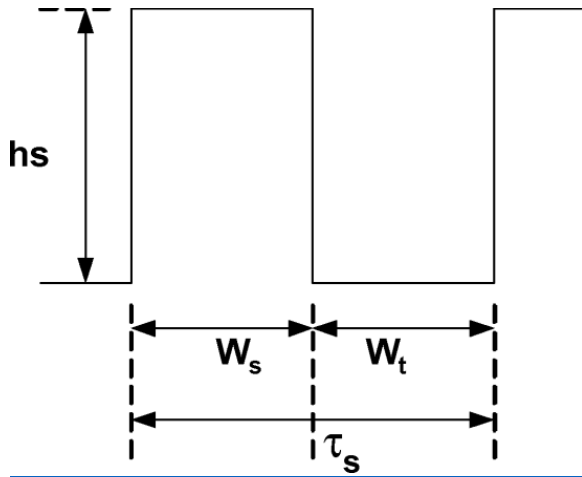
Key dimensions defining one stator slot pitch of the machine.
